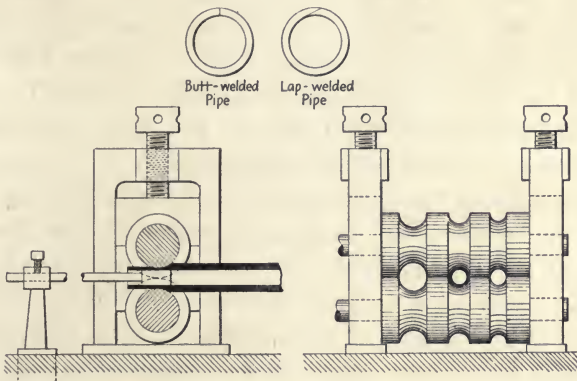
Diagram of pipe-welding rolls.
